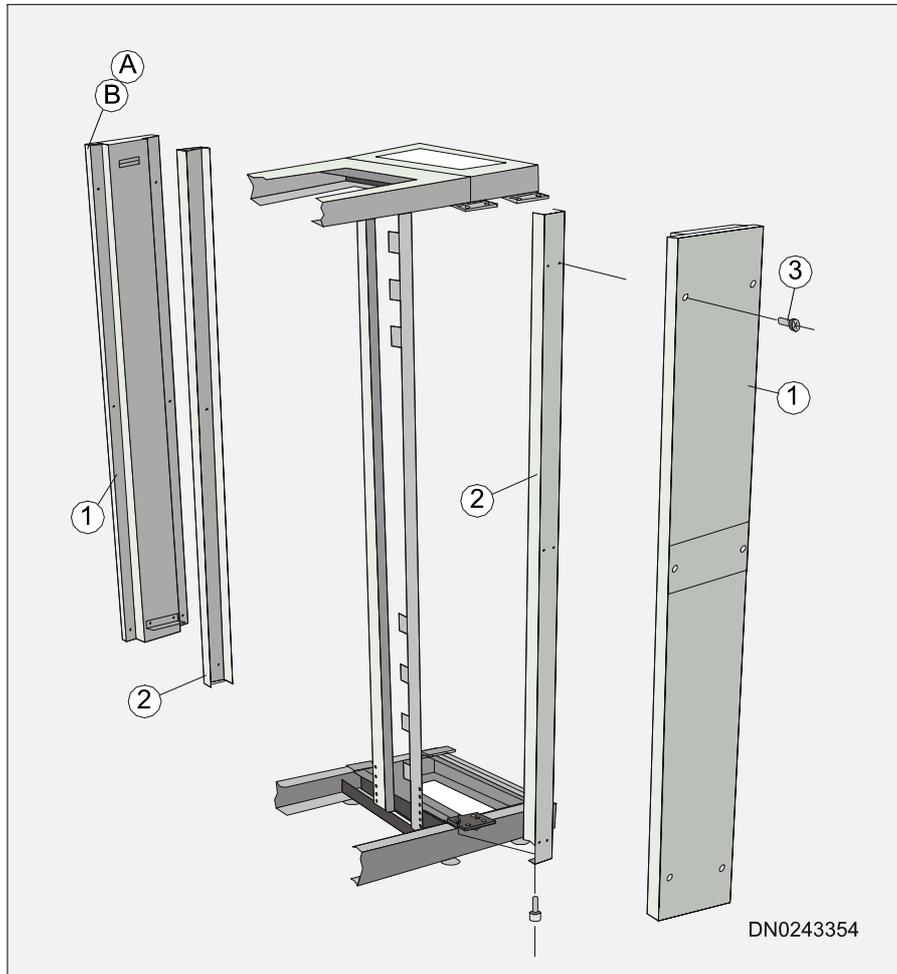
Mounting the door DS192-S to cabling rack R2A1-T.
